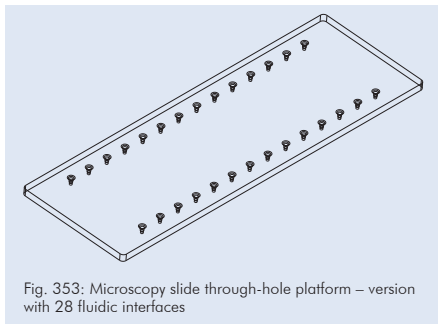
Microscopy slide through-hole platform – version with 28 fluidic interfaces
